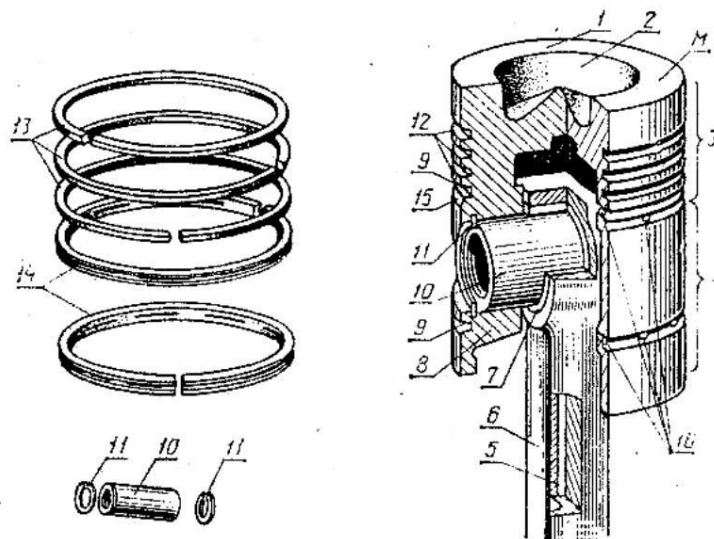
Piston, piston rings and piston pin 1-tube; 2-combustion chamber; 3-compression part; 4-guide part; 5-groove in the connecting rod; 6-connecting rod; 7-connecting rod bushing; 8-bump; 9-oil seal ring groove; 10-piston ring; 11-ring; 12-groove for compression ring; 13-compression ring; 14-oil seal ring; 15-circular groove; 16-oil passage hole.
